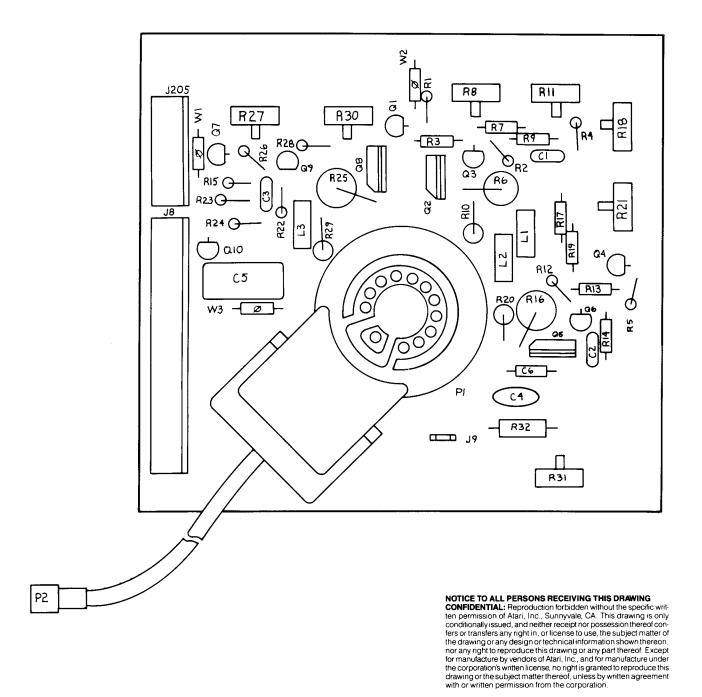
Neck PCB Assembly 19-Inch Display A201020-01 B 25-Inch Display A201020-03 A
